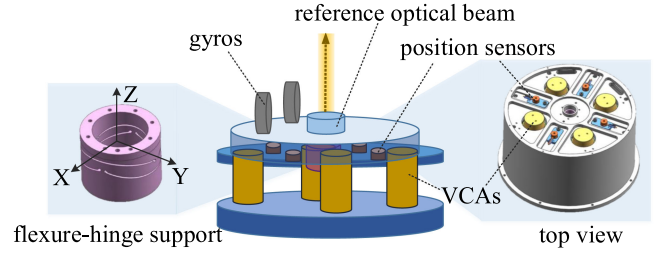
Design drawing of OBSP with flexure-hinge support.
